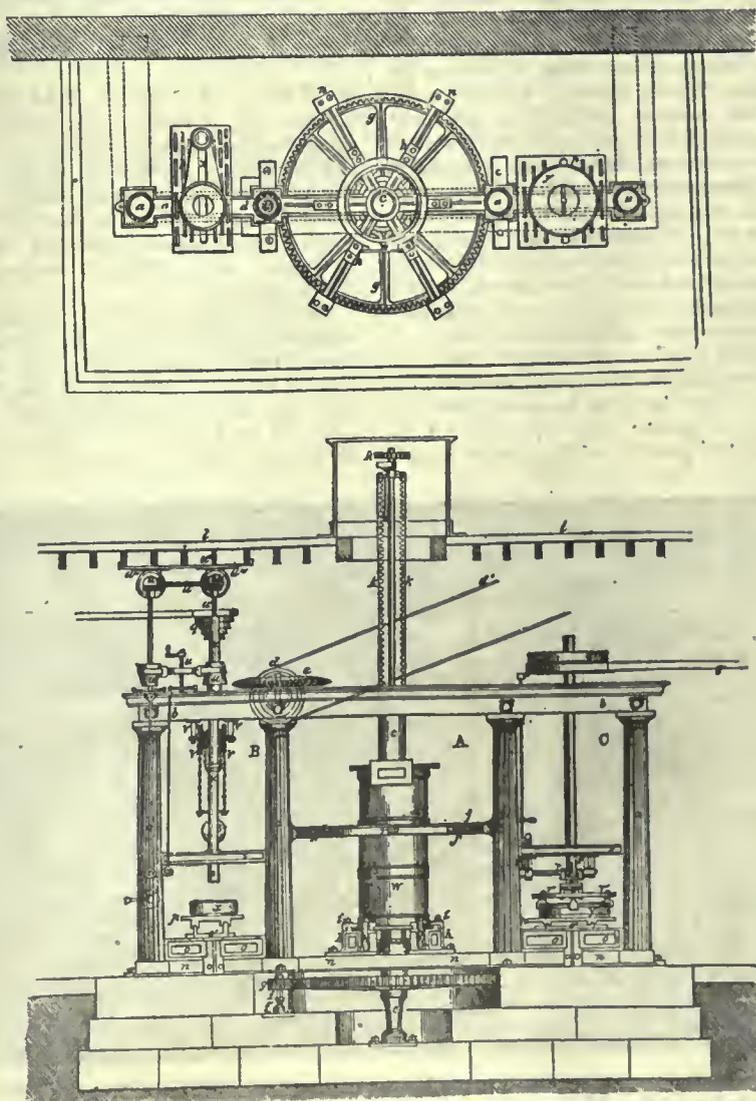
A COMBINATION BORING MILL, DRILLING, AND FACE GRINDING MACHINE.
